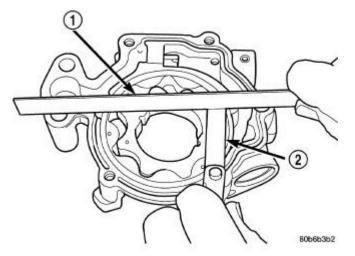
Measuring Clearance Over Rotors Courtesy of CHRYSLER LLC
